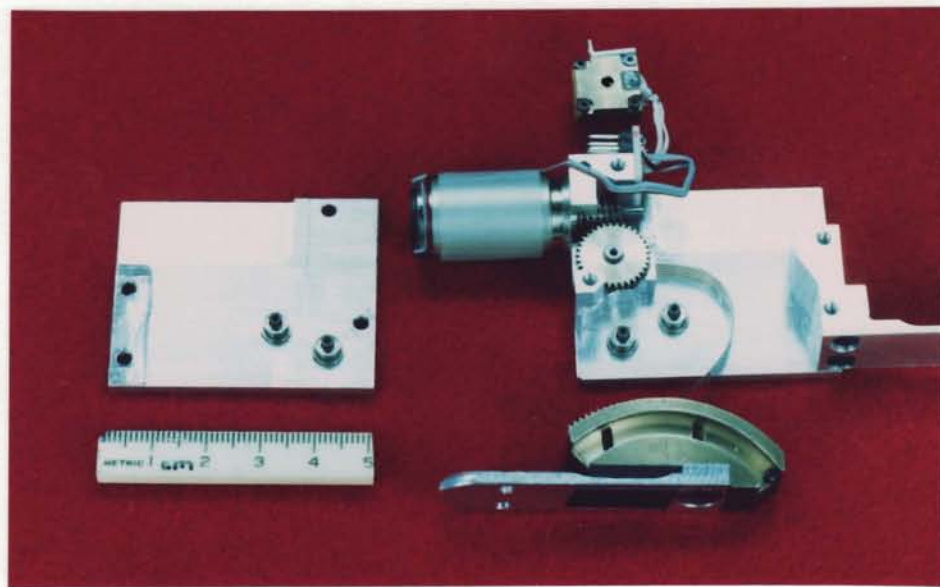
Details of the bearing mechanism used in the Model III virtual hinge. Two miniature ball bearings were attached to each sideplate with 0-80 UNF socket head cap screws (top), and rode in sliding-fit channels machined into the hinge slider (bottom).
